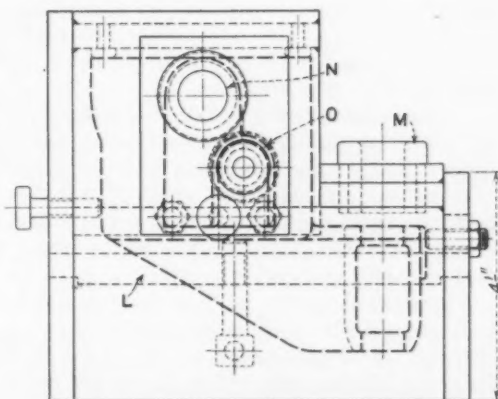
This welded jig accurately locates the quick-change gear box shown in fig. 1 for drilling and reaming the holes required. Drill bushings are marked M, N, O and P.
